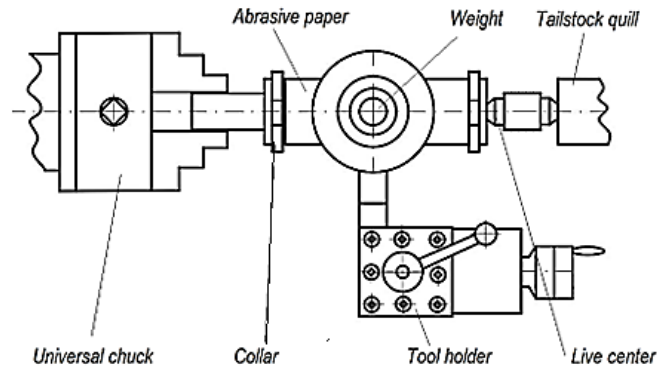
Top view of the abrasive erosion testing device using the pin-on-cylinder method
